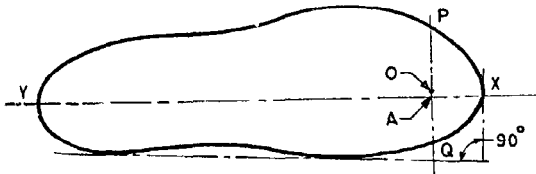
POSITION OF MEASUREMENT OF CLEARANCE
